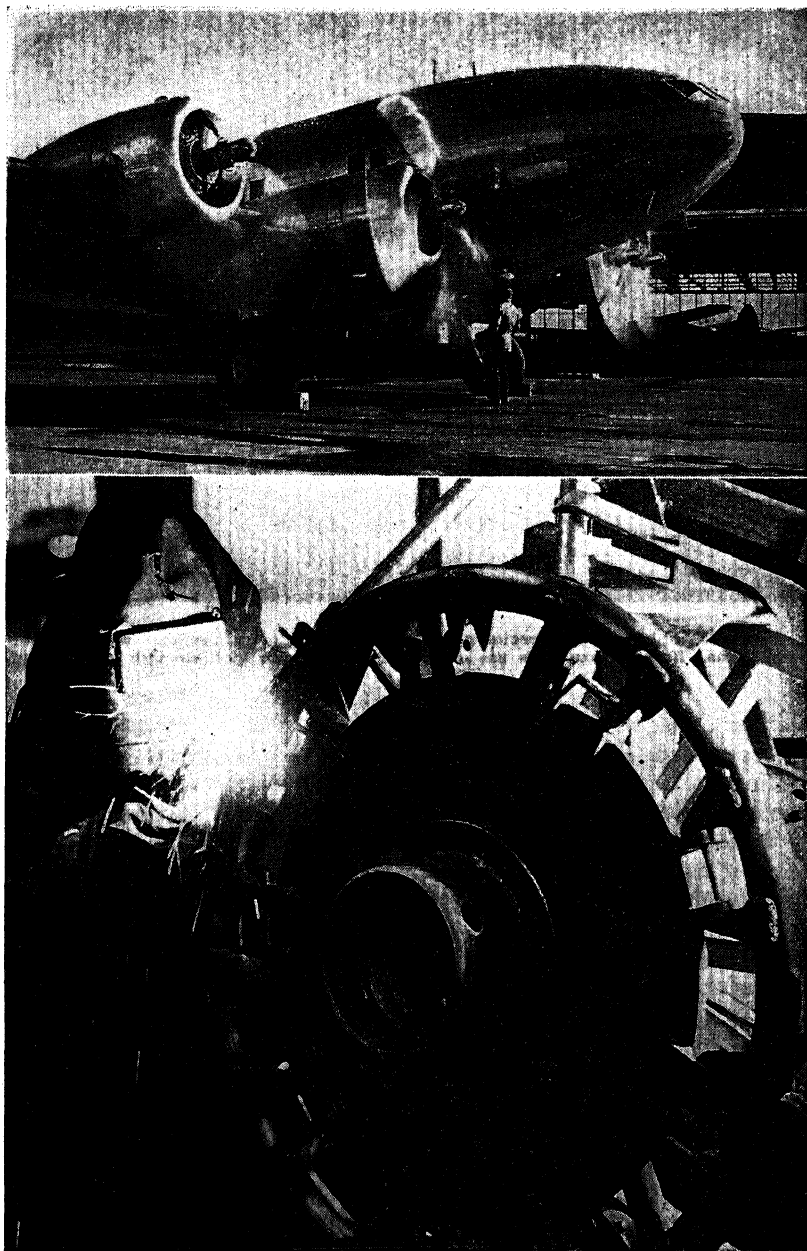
Welding a motor-mount for a Stratoliner, closeup of which is shown in the view at the top. The jig used for holding the mount is also of arc welded construction.
